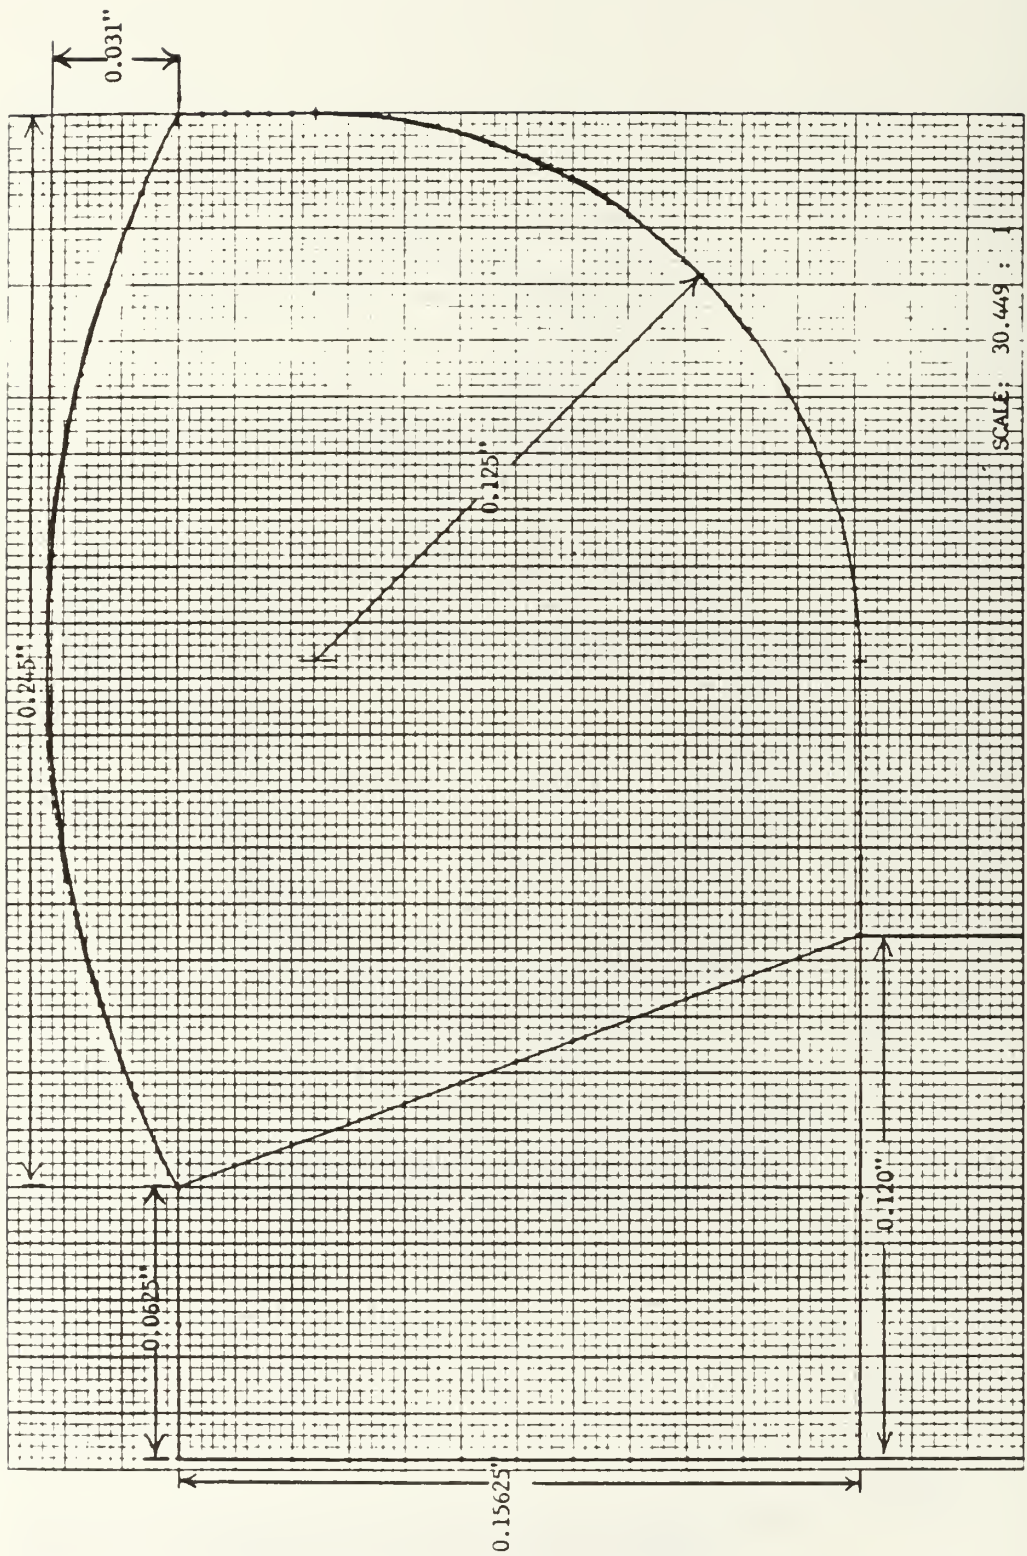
Plot of Constructed Weld Geometry for Modelling Purposes.
